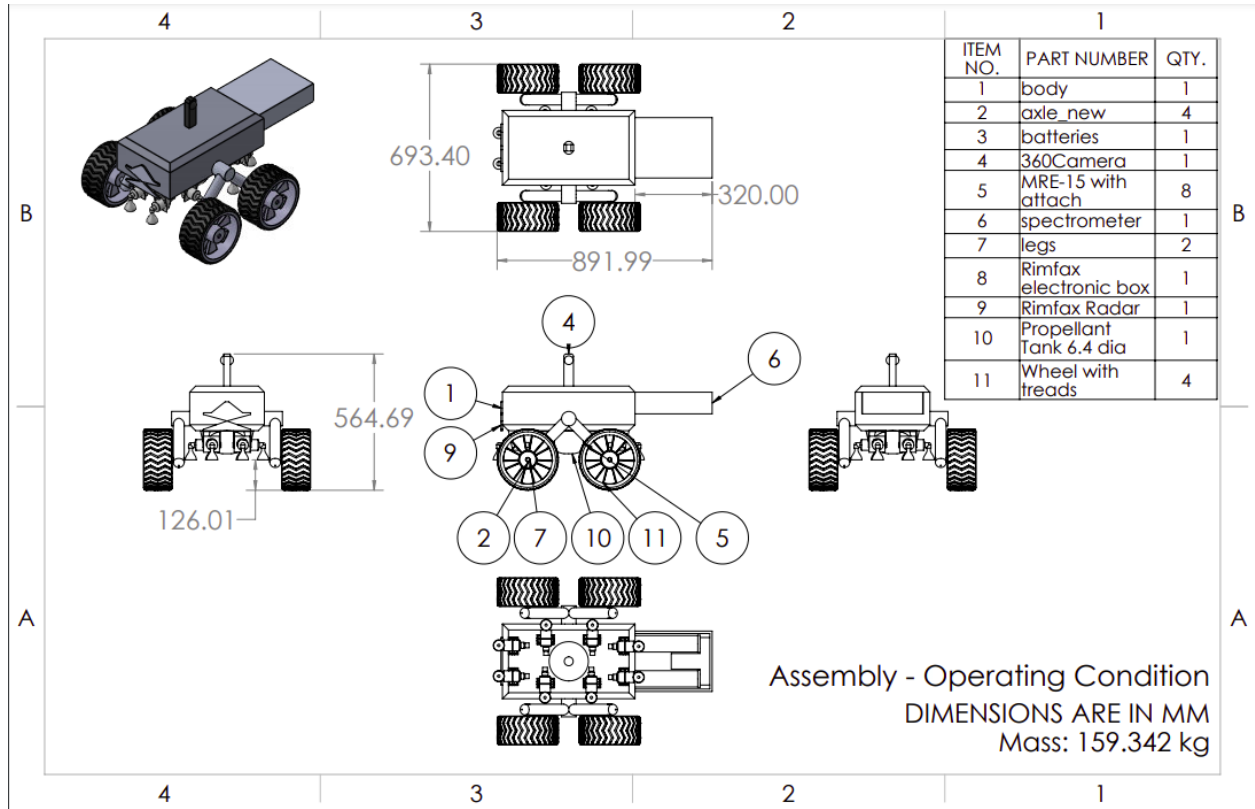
Dimension Drawing, Assembly "Operating"
